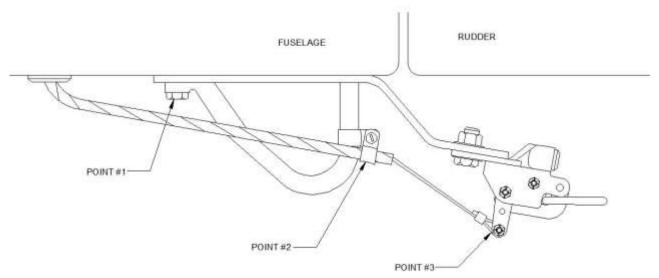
Tow Hook Installation on Piper Models PA-22, and Colt-108.
